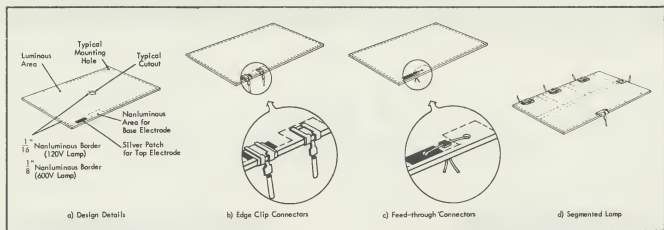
Ponelescent lamp Design Details and Methods of Electrical Connections.
